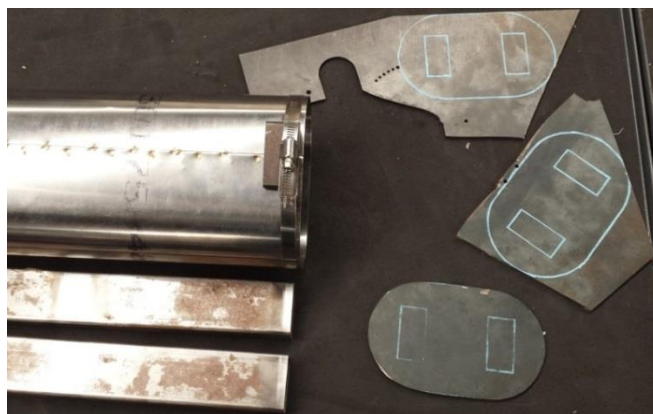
The new case, jig bulkheads and jig spines prior to fabrication.
